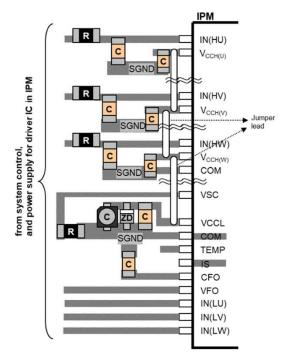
Image of recommended PCB layout (High-side bias voltage part)
